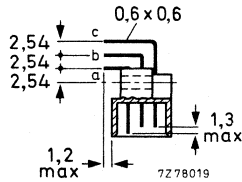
90° angled dip-solder pins with protruding earth contacts.
